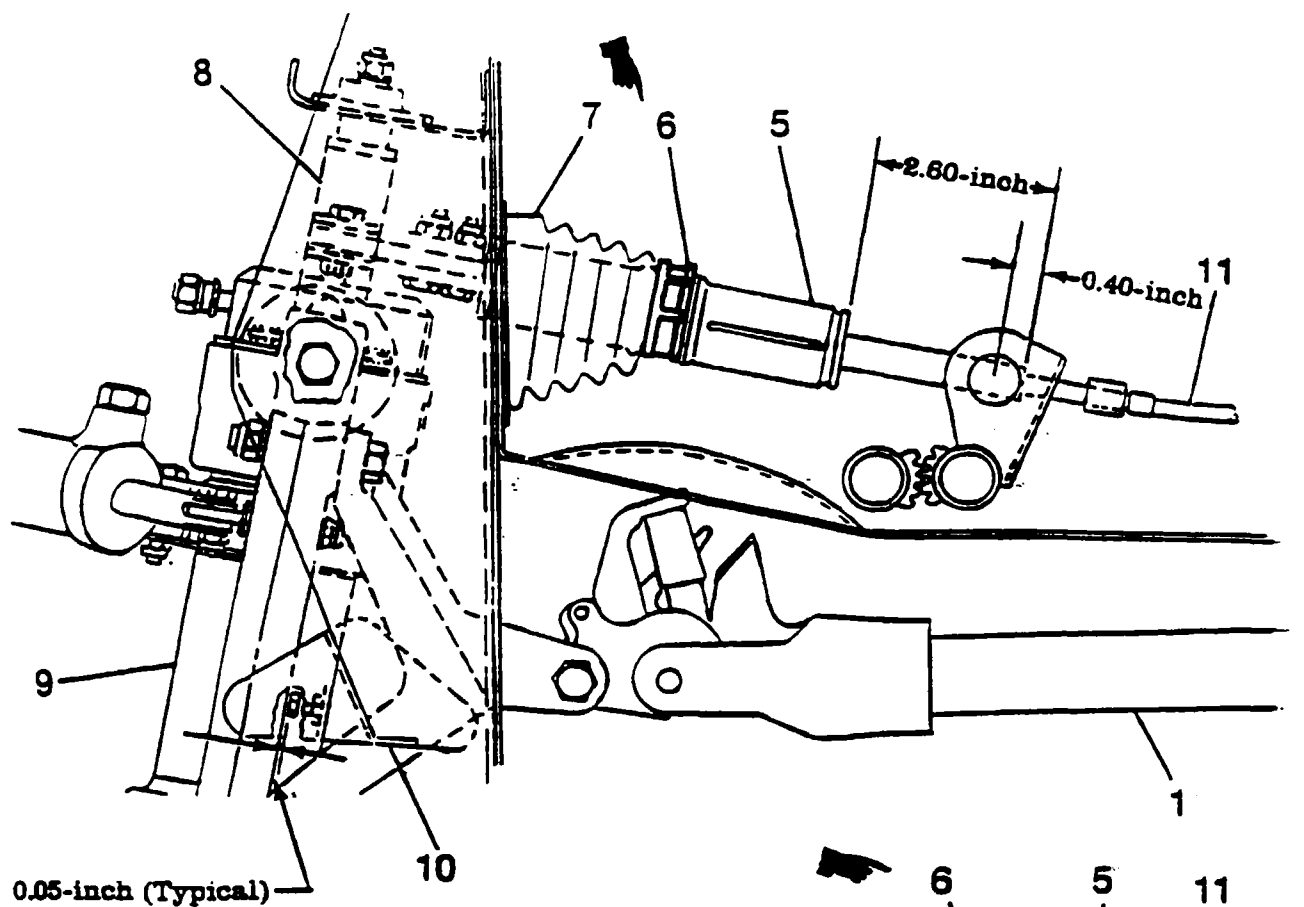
Nose Gear Steering (Sheet 1 of 2)
